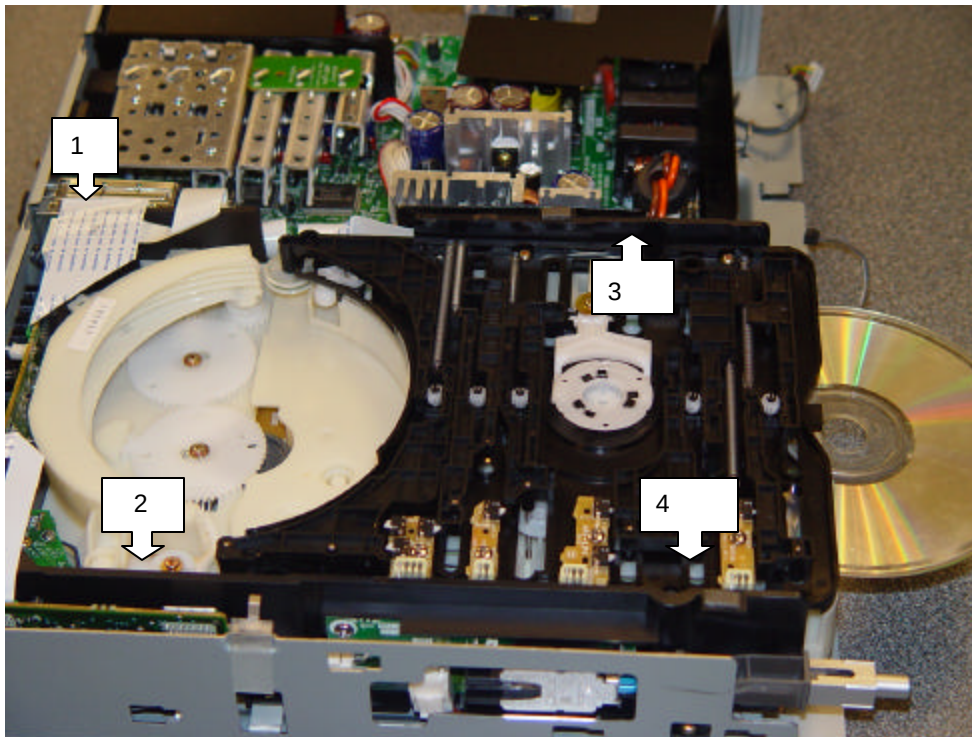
DISC MECHANISM REMOVAL - TOP VIEW - 4 SCREWS
